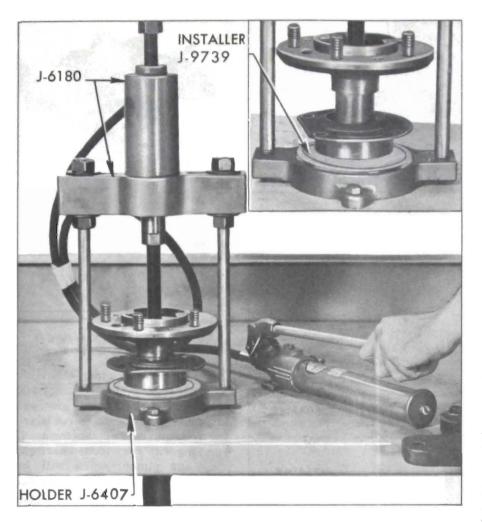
Installing Rear Wheel Bearing or Retaining Ring
